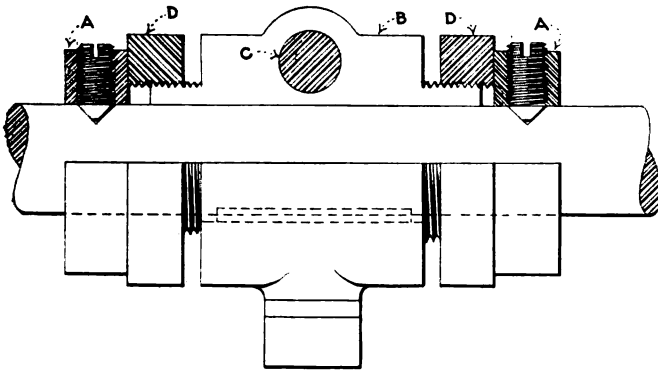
ARRANGEMENT FOR ADJUSTING CAM ROLLER
